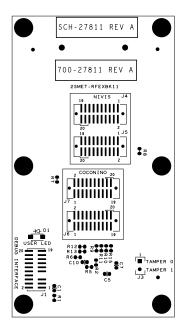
Bottom side view of the K11 expansion board (not scaled)
